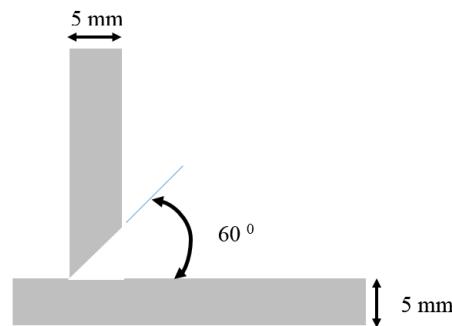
A 60° fillet joint configuration for full penetration weld setup used in the experiments.
